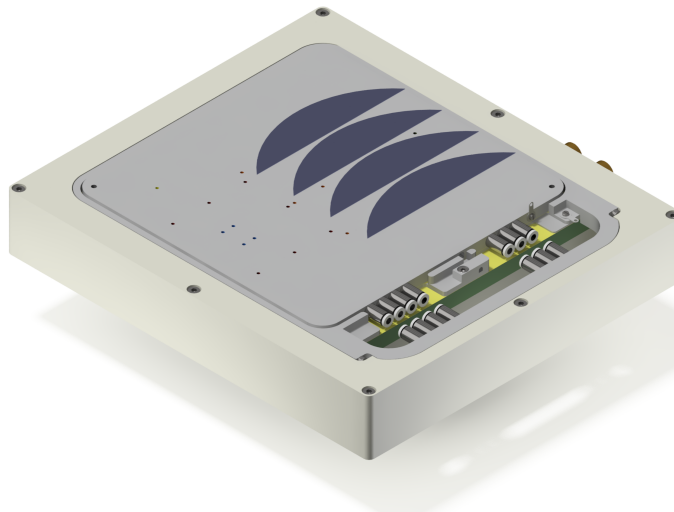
CAD drawing of the vacuum jig for automated PQC with four mounted “halfmoon” wafer cutoffs.
